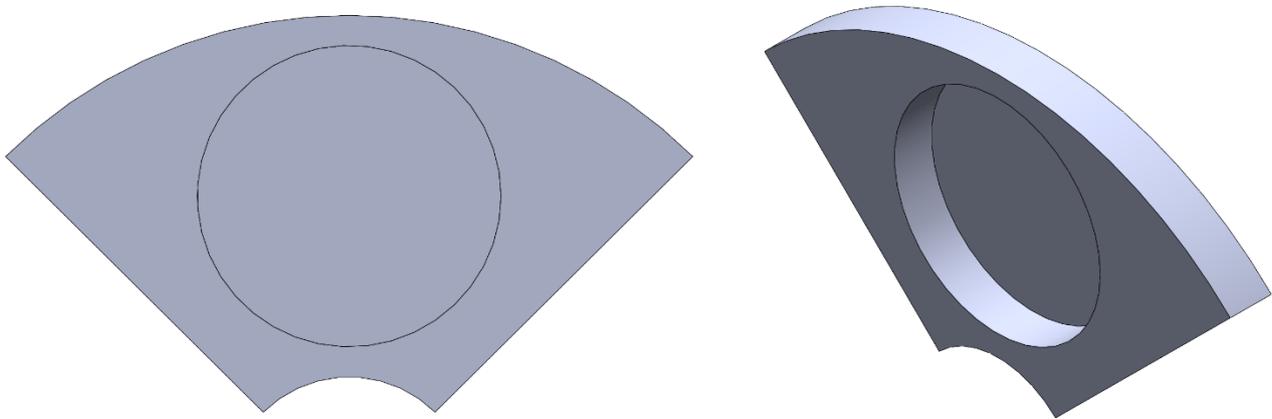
Isometric cross-sectional view of the CAD of the fluid domain
